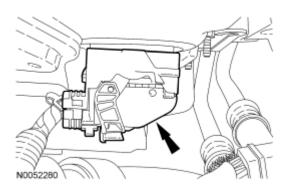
Identifying Transaxle Control Electrical Connector Courtesy of FORD MOTOR CO.
